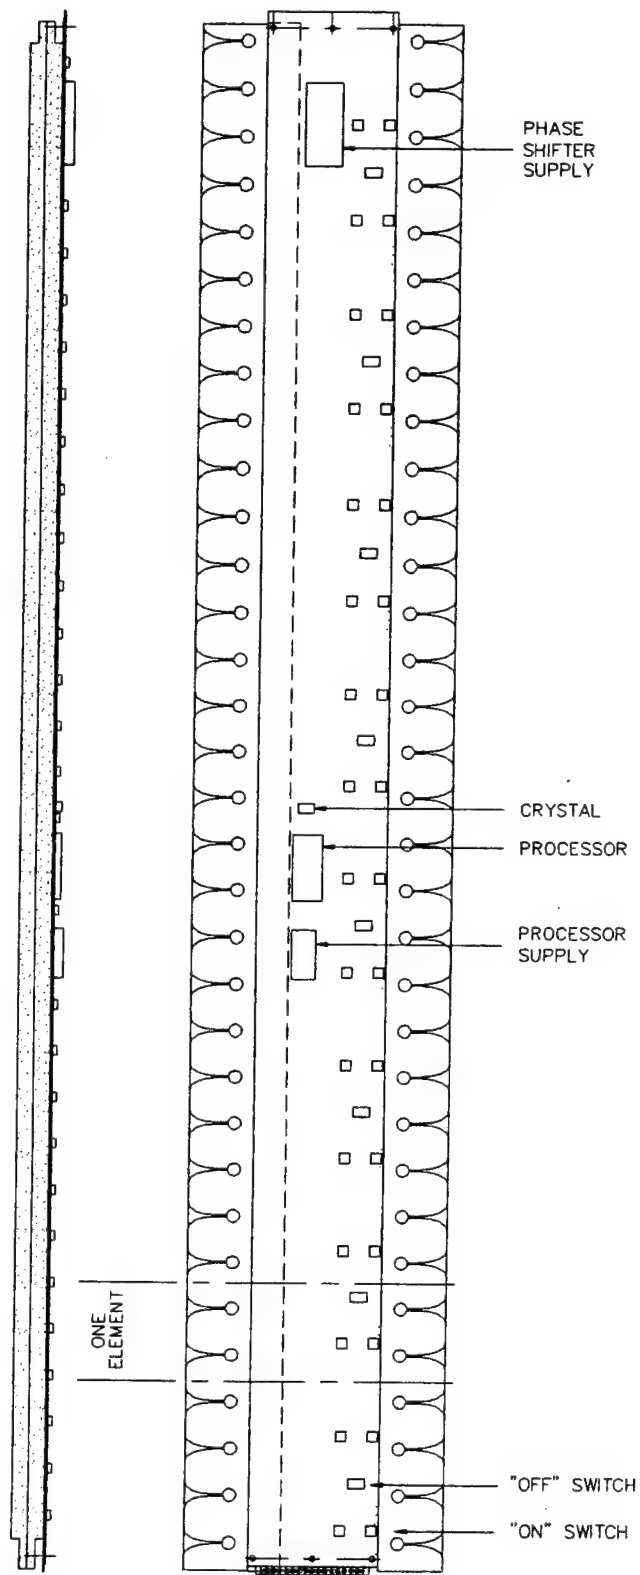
Mechanical Layout of One 23.2" Aperture PC Board (back view)
